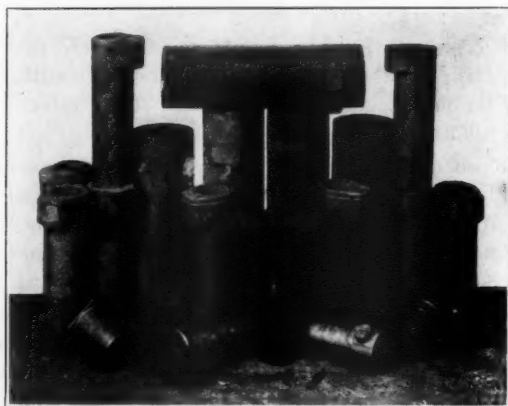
GROUP OF SLEEVE VALVE CASTINGS CAST BY THE HURST-BALL SYSTEM
